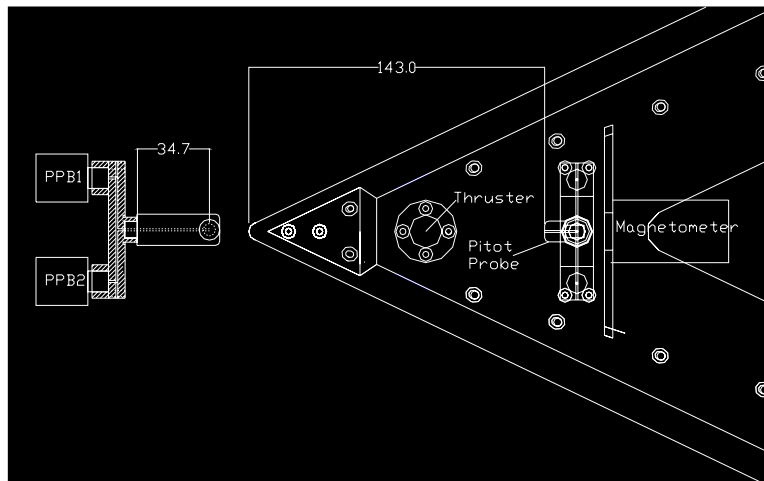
Payload leading edge showing Pitot probe and magnetometer location (all measurements in millimeters)
